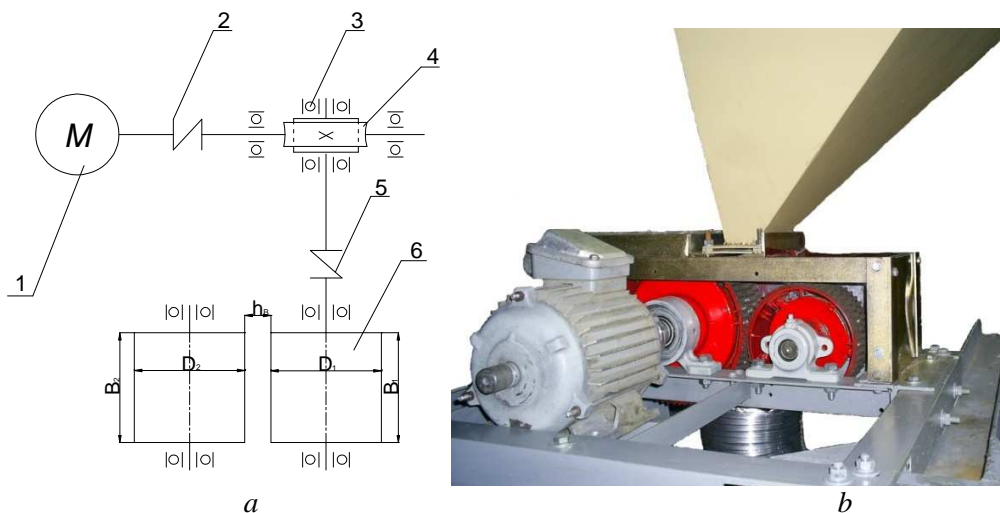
Roller compacting device: a - construction scheme; b - general view; 1 - electric motor; 2, 5 - couplings; 3 - bearings; 4 - worm reducer; 6 - working element (roll).
